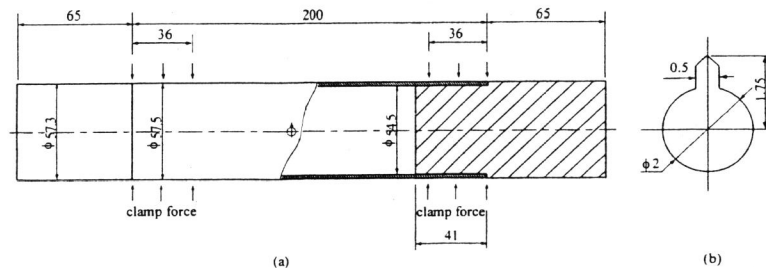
(a) Illustration of the specimen; (b) detail of crack starter notch.
